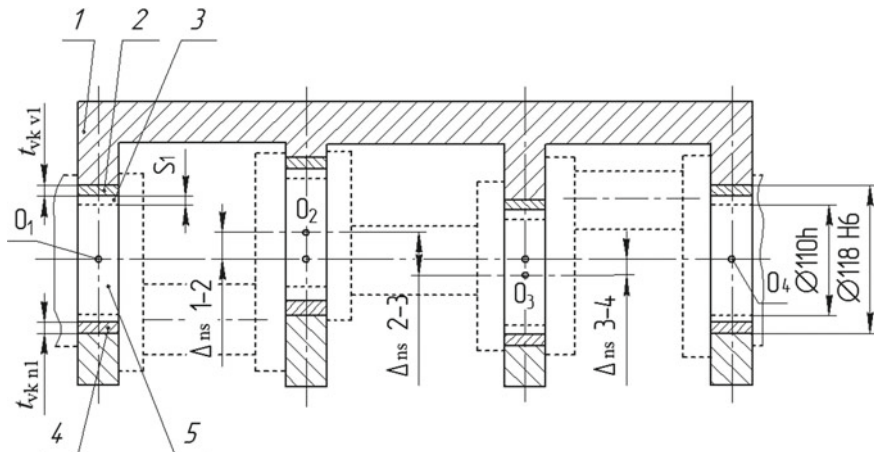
Scheme of modular multi-support unit of the shaft with the number of supports equal to the number of 4: 1—crankcase, 2—upper liner of the sliding bearing crankcase, 3, 4—lower liner of the sliding bearing, 5—crankshaft; $t_{vk.vi}$, $t_{vk.n.i}$ thickness of the upper and lower liners; S_1 —radial clearance of the liner of the first support
